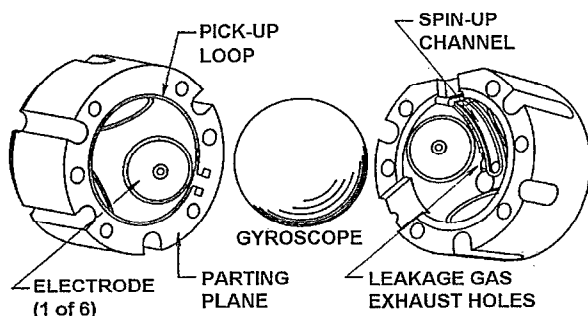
Exploded view of the GP-B quartz gyroscope assembly.
